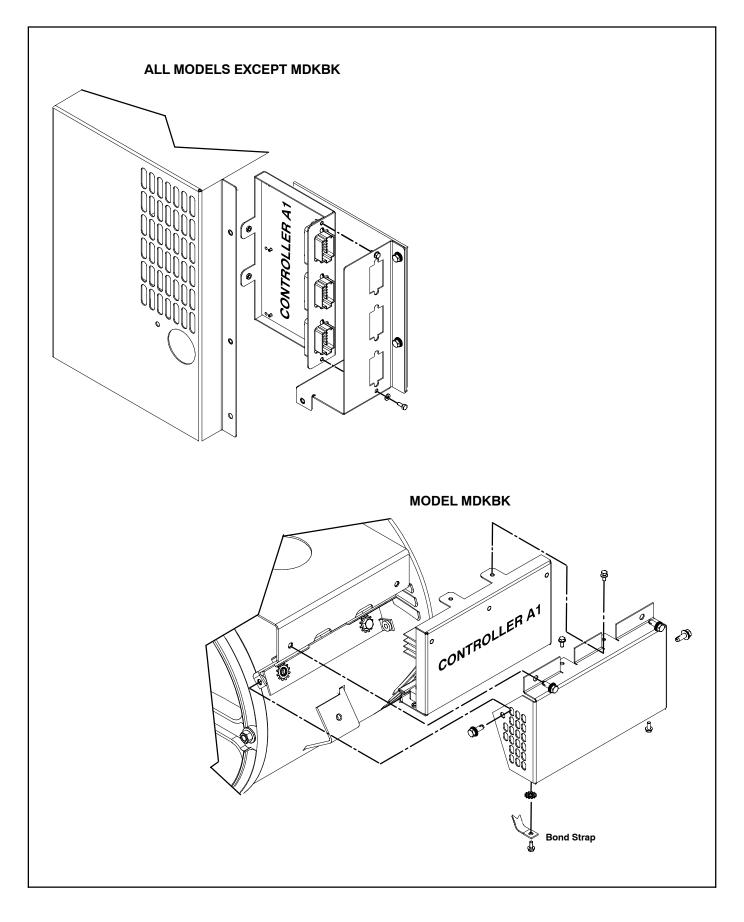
GENSET CONTROLLER AND ITS MOUNTING
